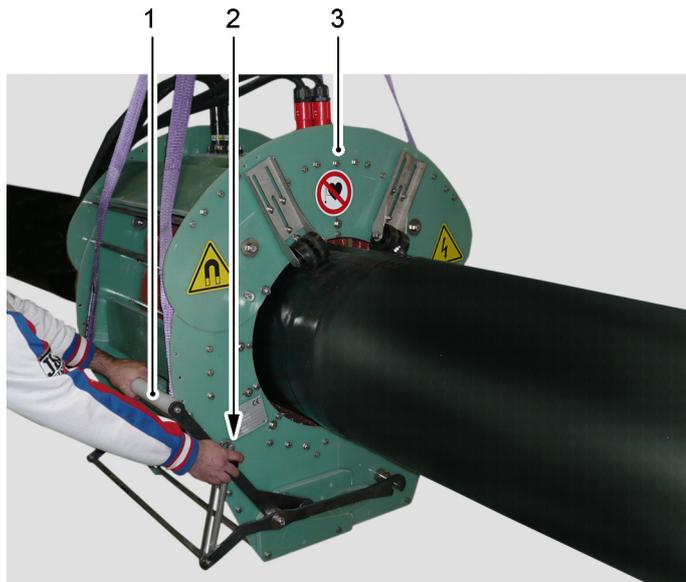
Locking of the handle for opening/closing the clamp coil
